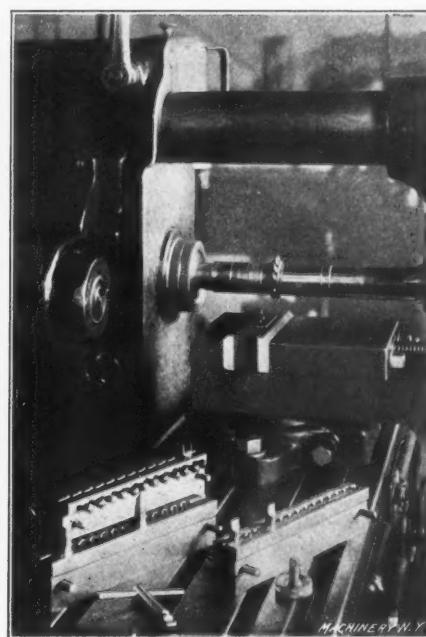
Milling the Slots in the Pieces *A*, Fig. 7
